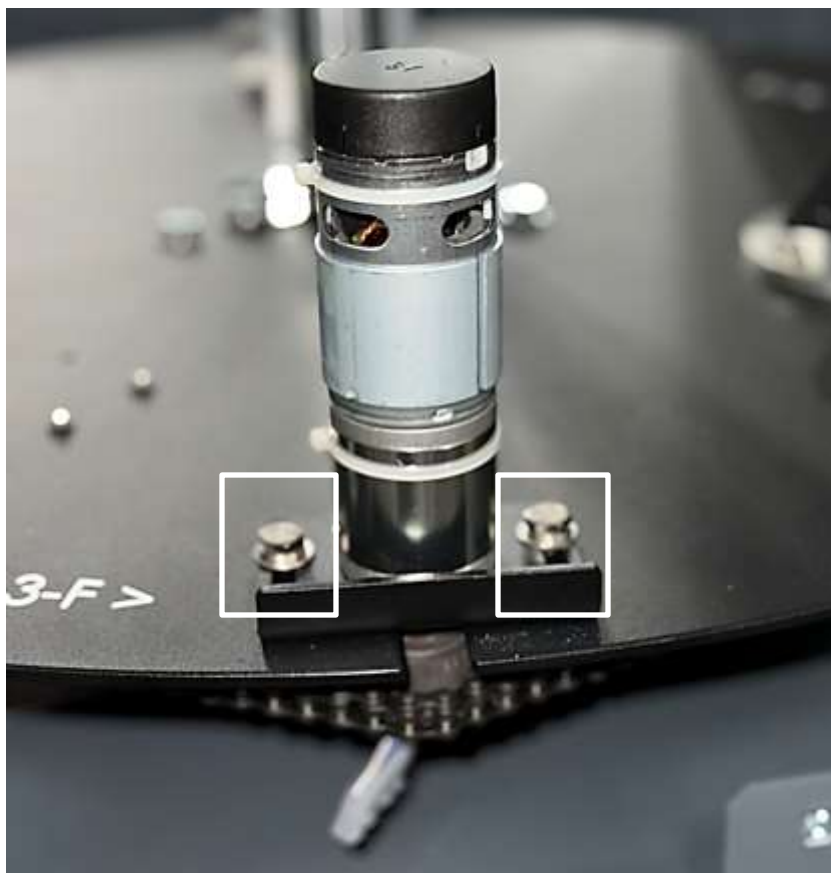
Stack Motor and Chain Tensioning Bolts
